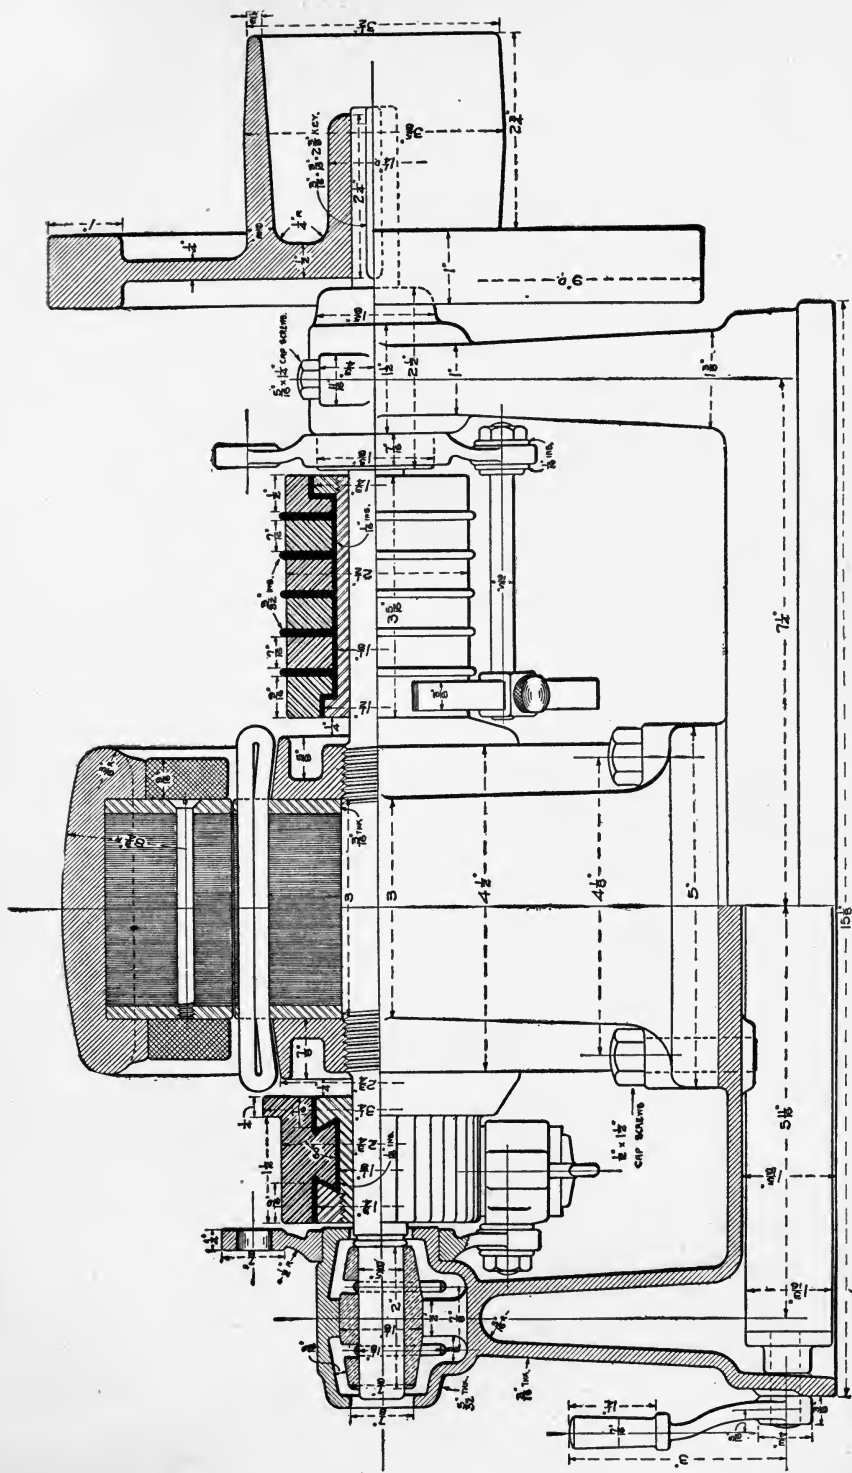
LONGITUDINAL ELEVATION OF THE COMPLETE MACHINE, ONE-HALF IN CROSS SECTION.
